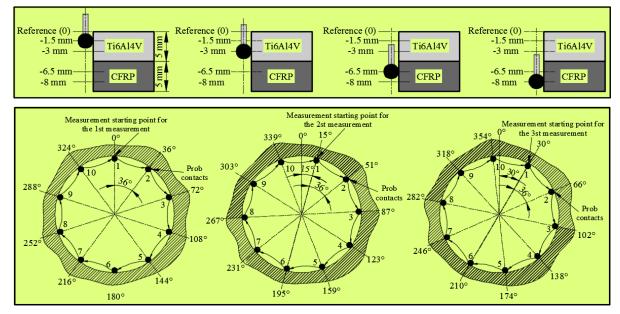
Schematic representation of dimensional accuracy and roundness error measurement on CFRP/Ti6Al4V stack.
